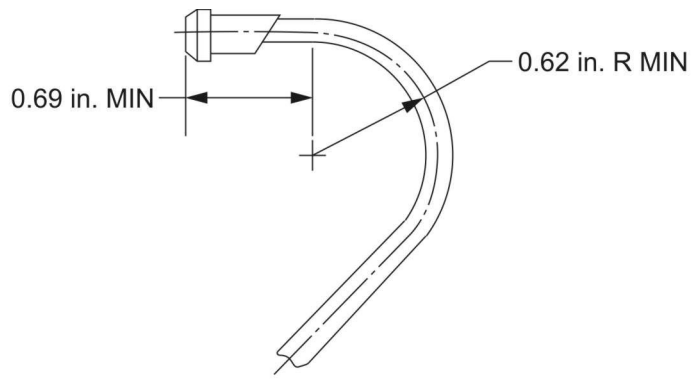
Fuel Line Showing Minimum Dimension for Bending
